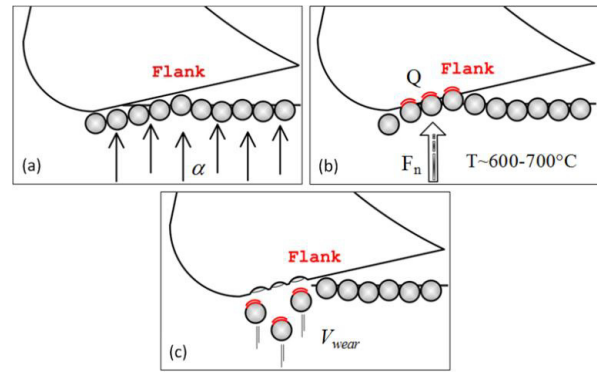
Formation of notch damage subsequent to adhesive wear. (a) Springback of machined surface with an average magnitude α ; (b) Localized temperature rise through frictional heating, leading to the formation of built-up edge; (c) Collapse of built-up edge that forms notches.
